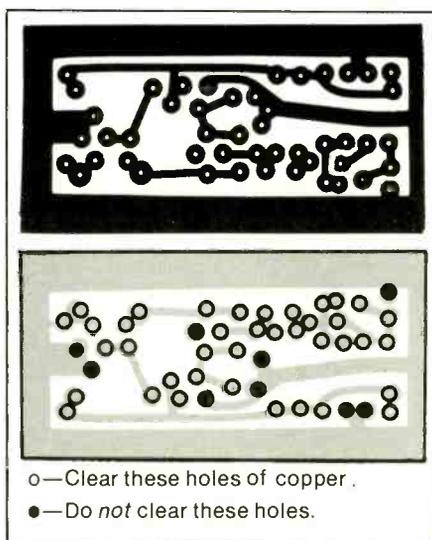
Actual-size etching-and-drilling guide (upper) and drilling/hole-clearing details (lower) for double-sided printed-circuit board.
